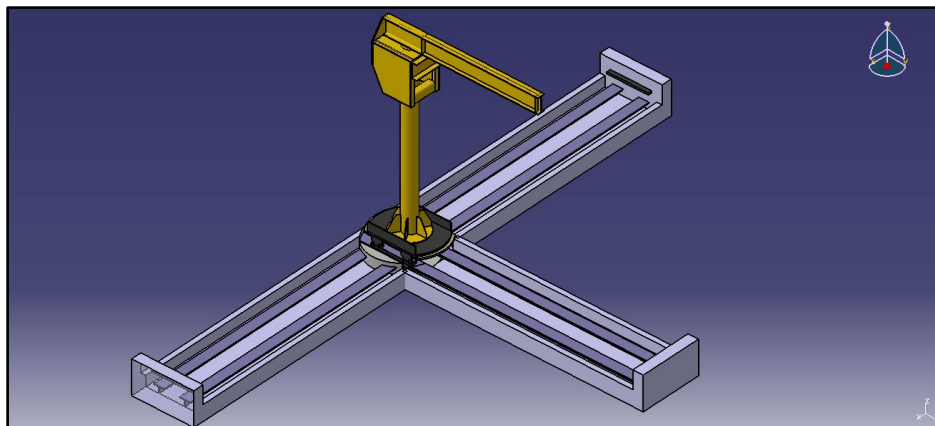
Fully Assembled Jib Crane Installed On The Guide Way.
